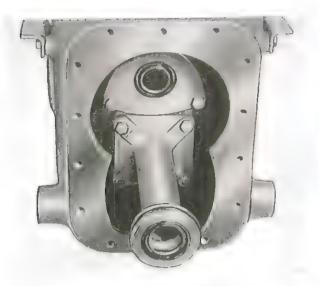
Transmission case with the P.T.-O. drive shaft sleeve.
